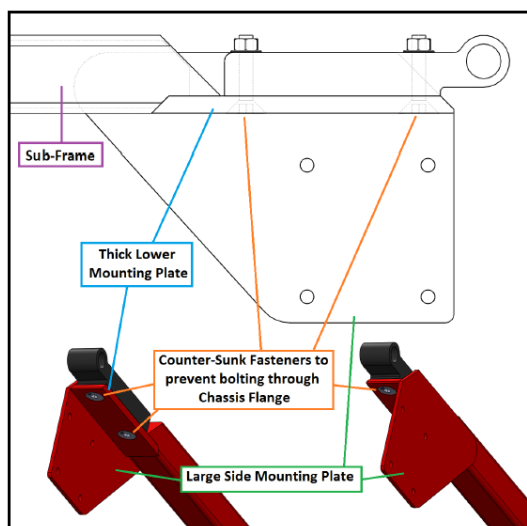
Countersunk fasteners to prevent bolting through chassis frame
